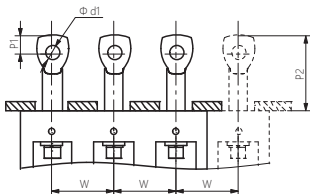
NXMS-1000 back-panel wiring outline and installation size
